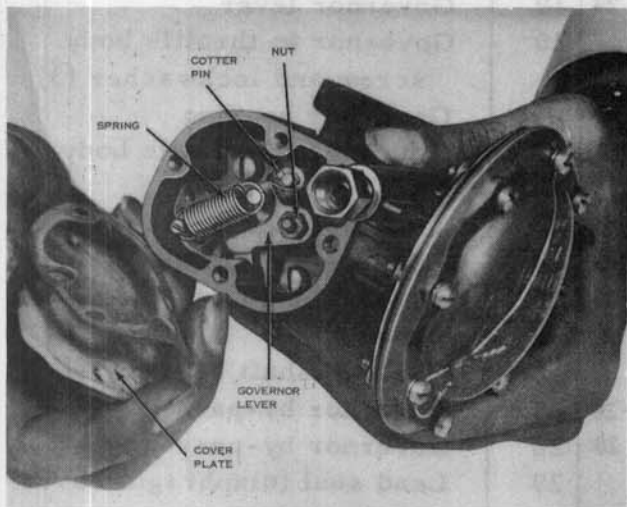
REMOVE GOVERNOR COVER PLATE, GASKET, SPRING & LEVER
